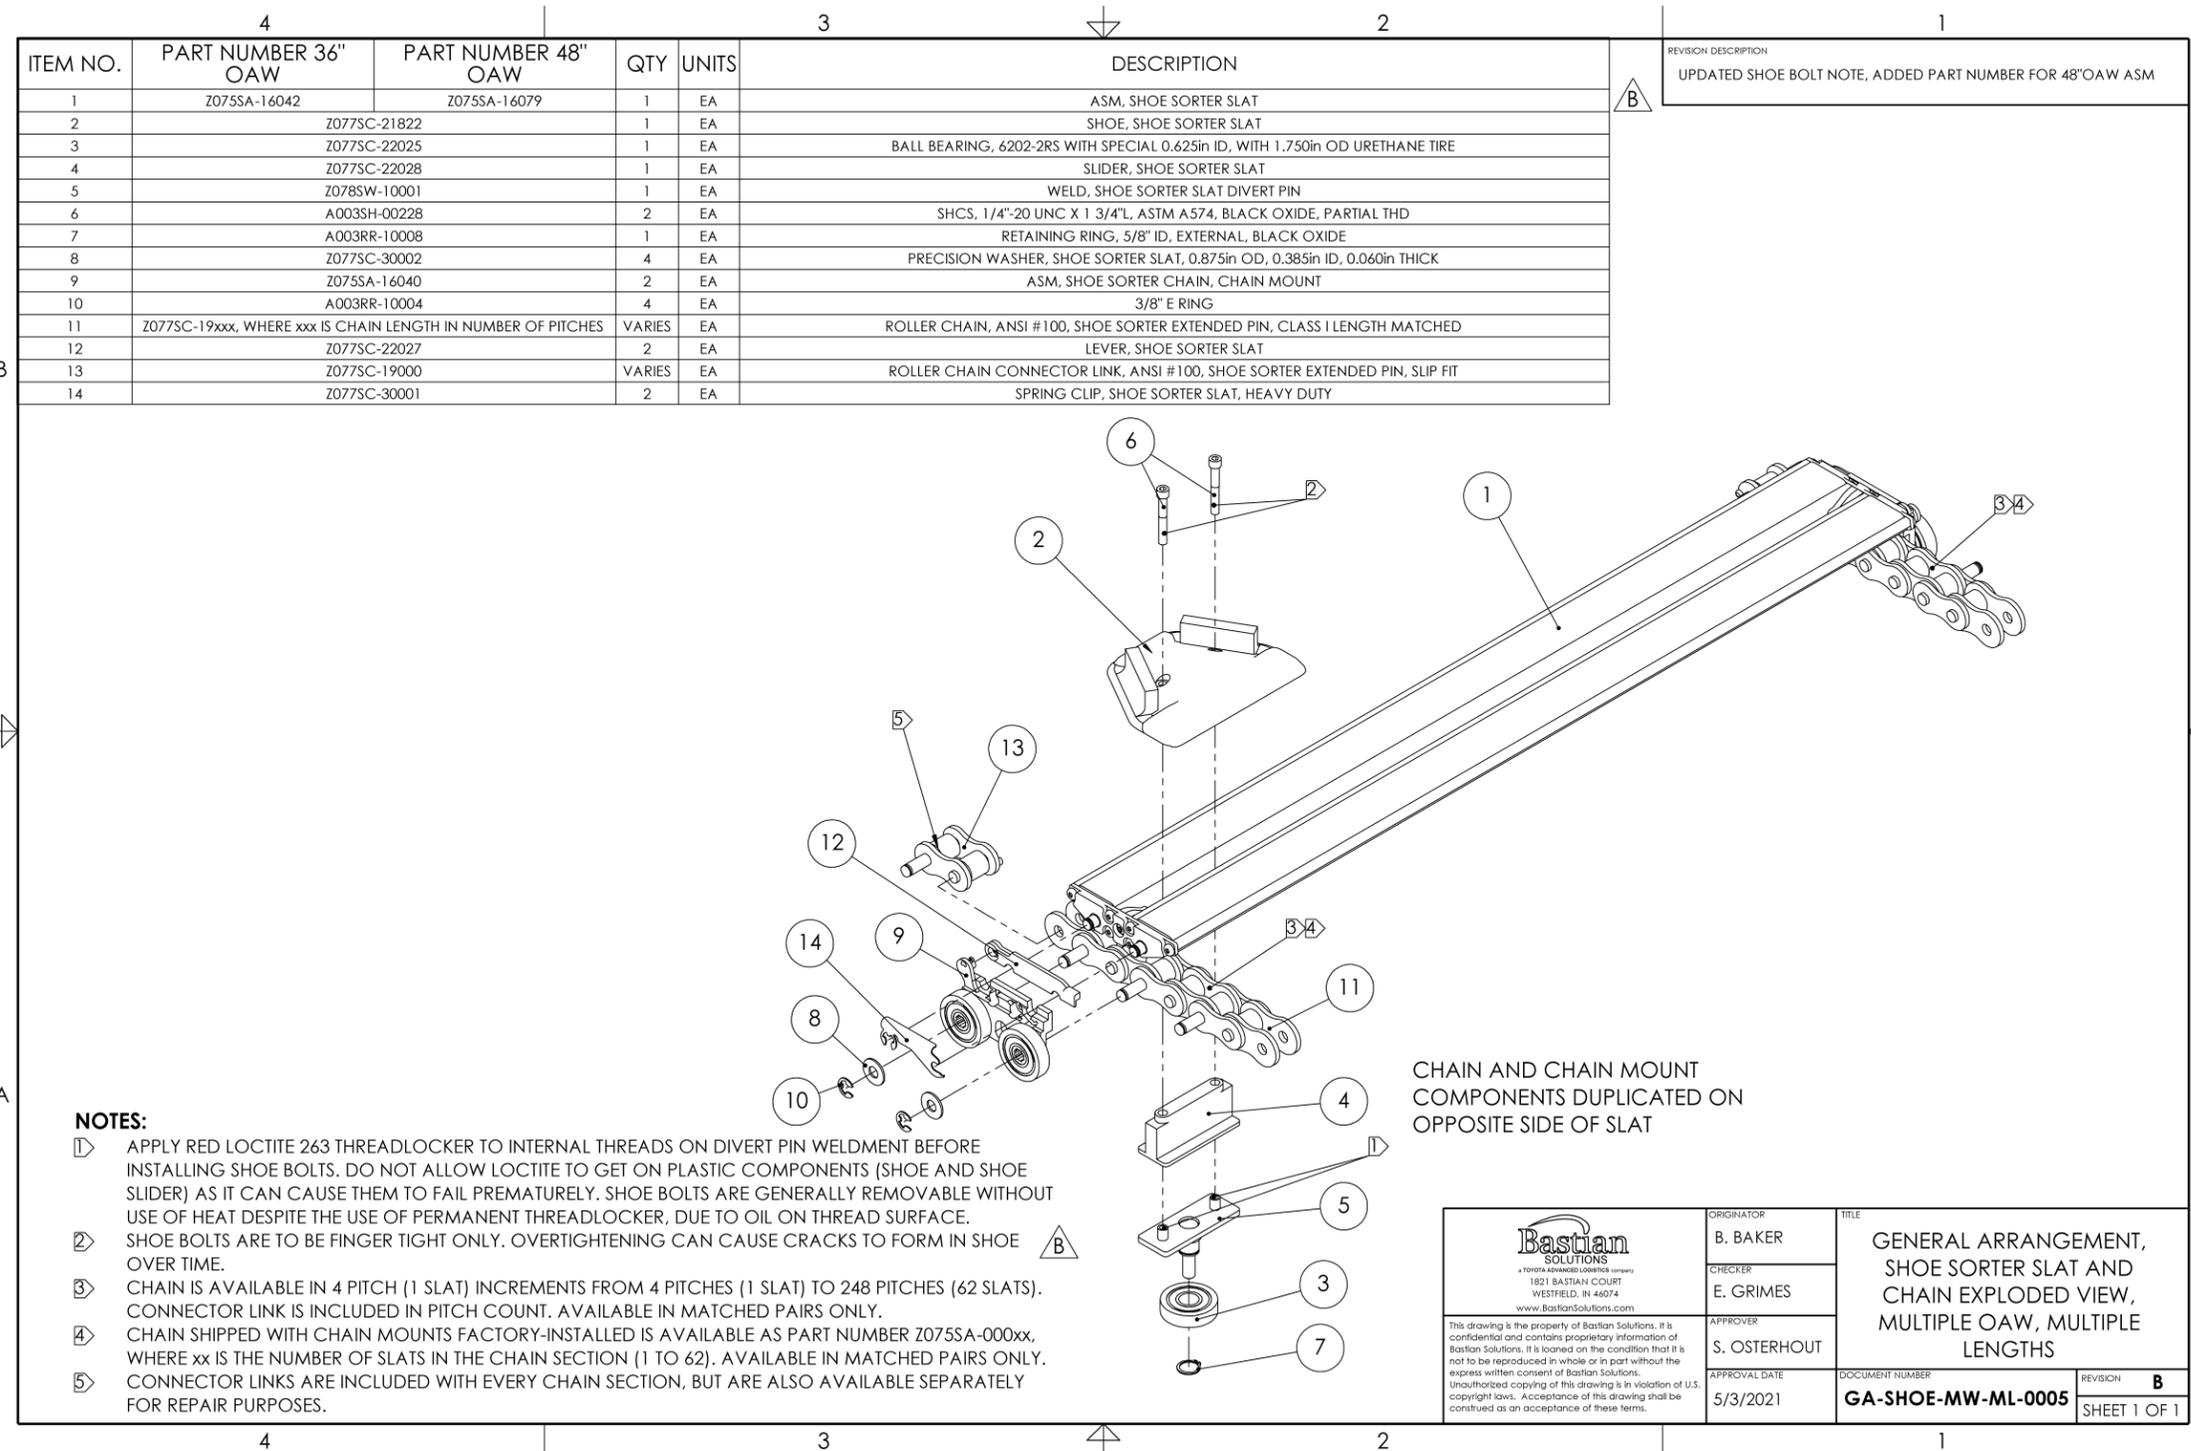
General Arrangement, Shoe Sorter Slat and Chain Exploded View, Sheet 1 of 1
